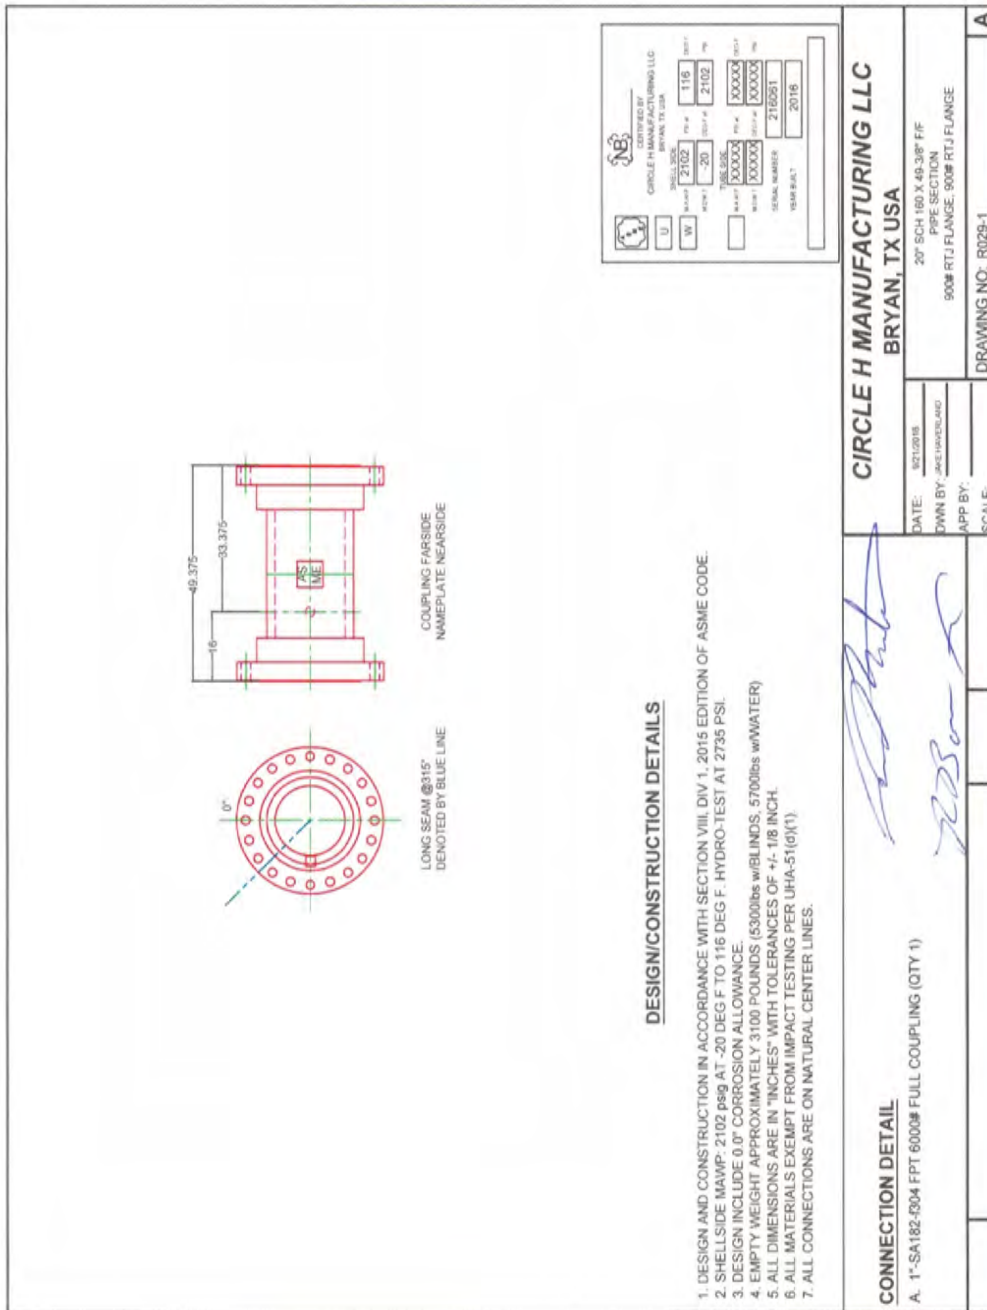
CIRCLE H MANUFACTURING DRAWING OF THE DRIVER AS CERTIFIED WITH APPROVAL SIGNATURES FROM THE RESPONSIBLE ENGINEERS.
